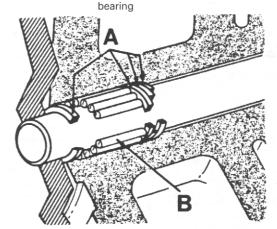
Needle roller (B) and spacer (A) arrangement when reassembling early N type gearbox (Sec 13)
